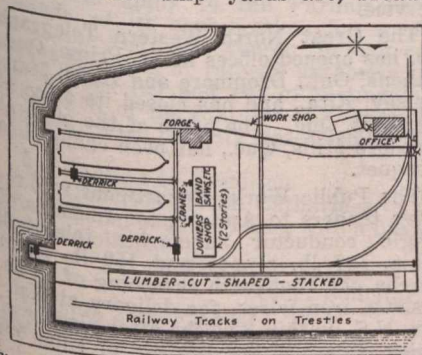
A typical wooden shipbuilding yard at Vancouver.
